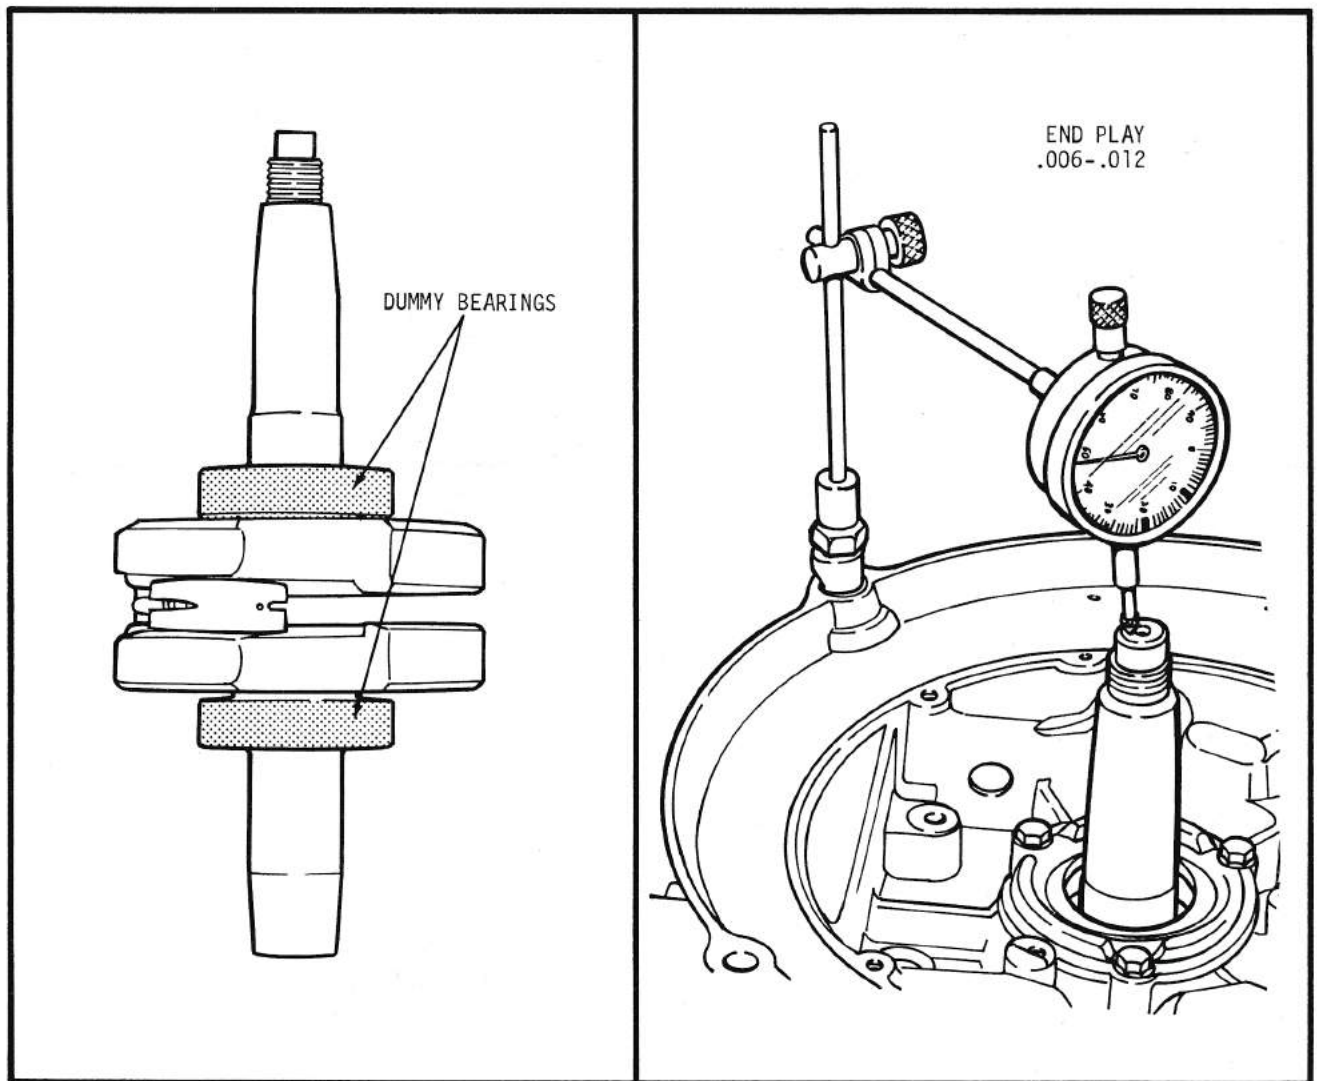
USE DUMMY BEARINGS TO ADJUST END PLAY
